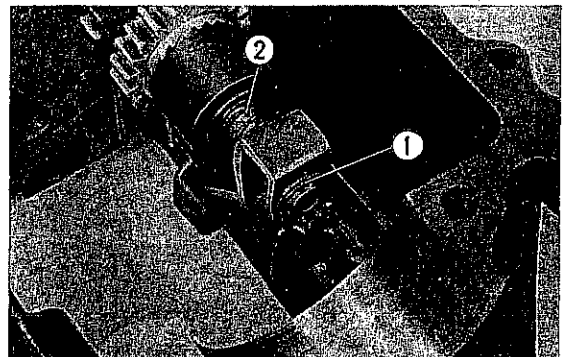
① 12 mm snap ring ② Kick starter shaft
